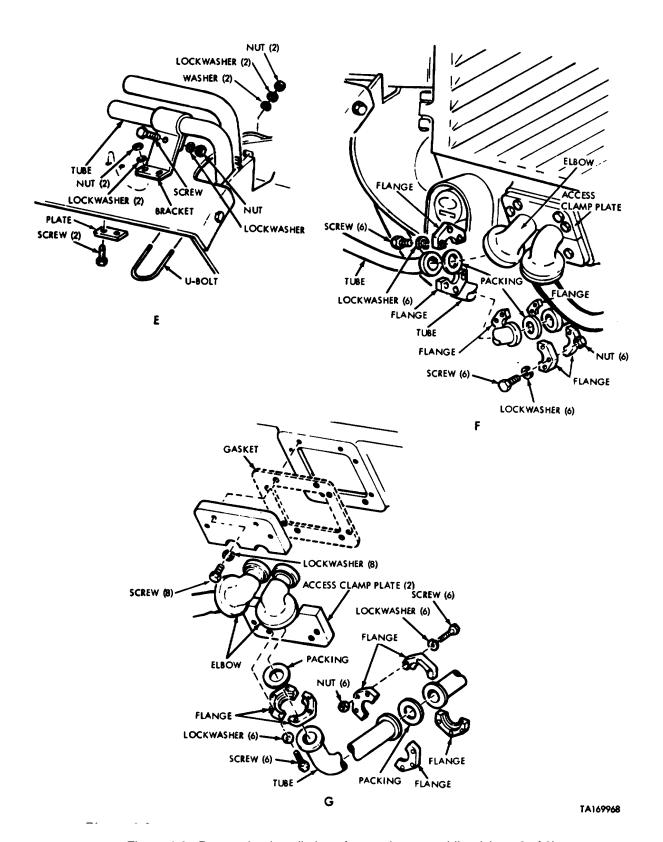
Removal or installation of rear tube assemblies (sheet 2 of 3).
